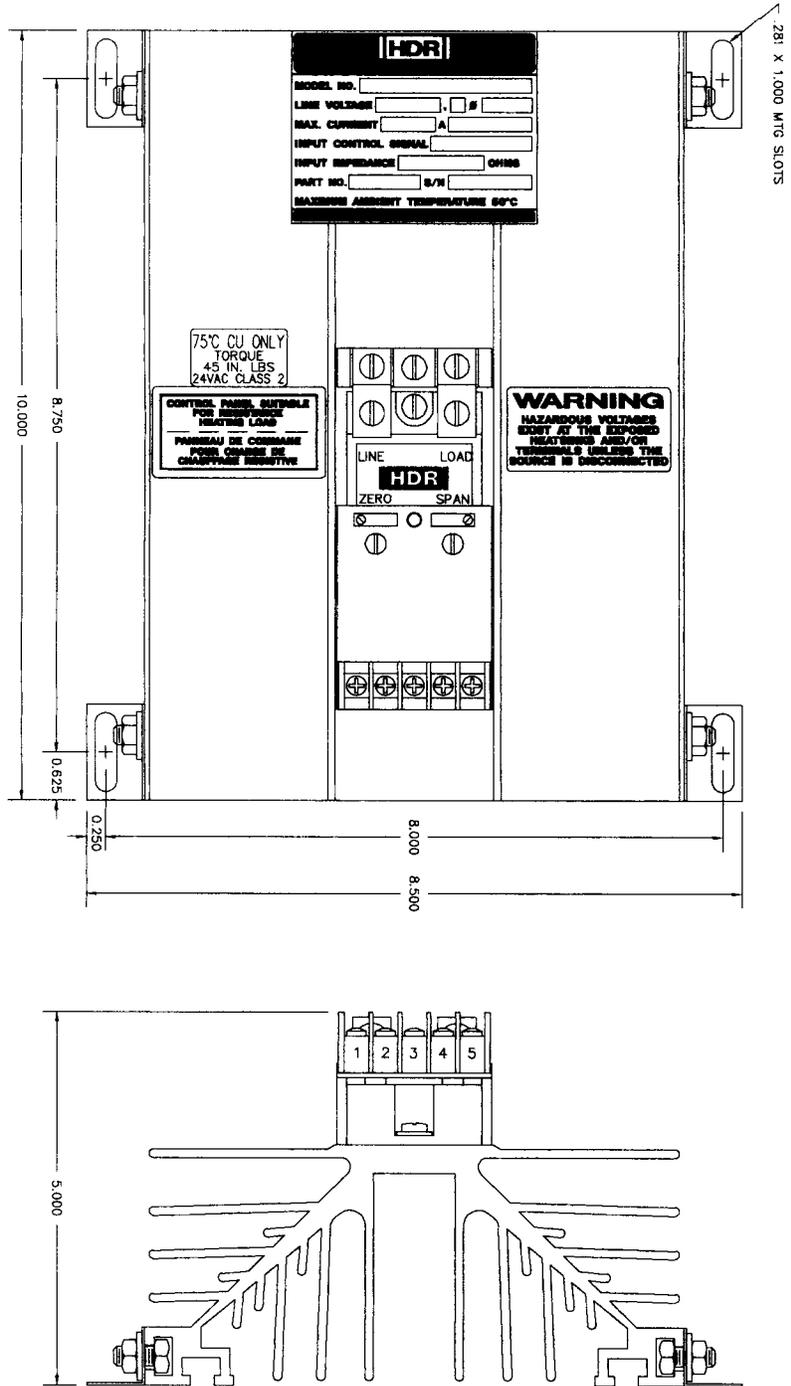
OUTLINE AND MOUNTING DIMENSIONS - 70A
